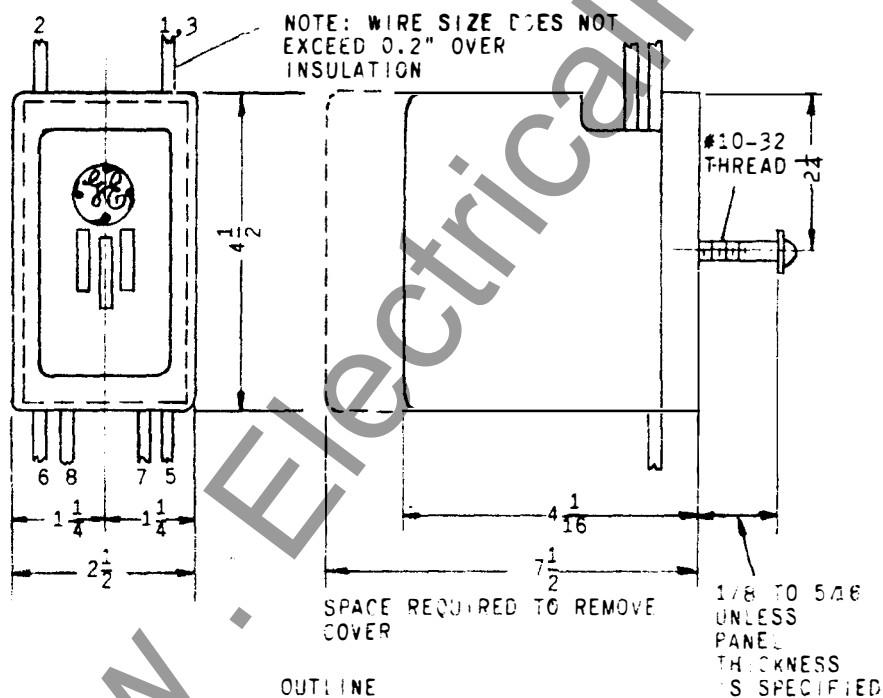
Outline and Panel Drilling Diagram for HGA14BA Relay (Surface Mounted)
